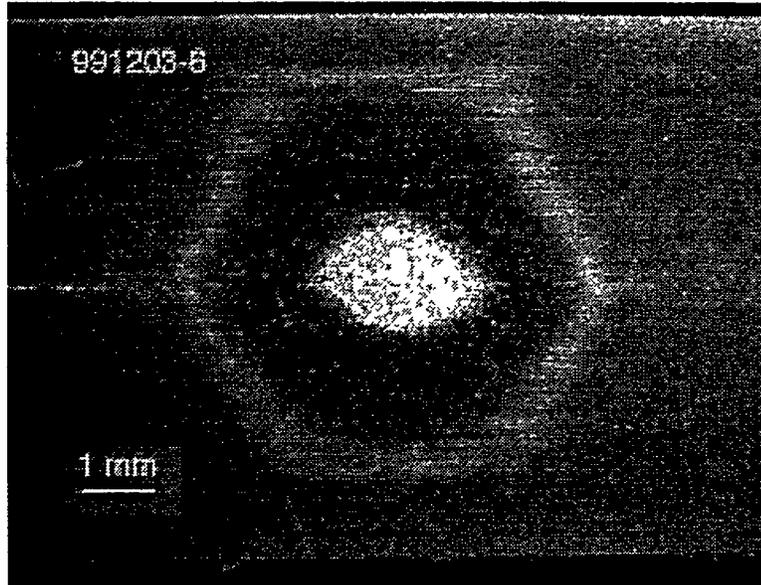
Cross sectional view of resistance weld of V-4Cr-4Ti alloy (Test No. 6 in Table 1) indicating small restructuring zone (white area)
